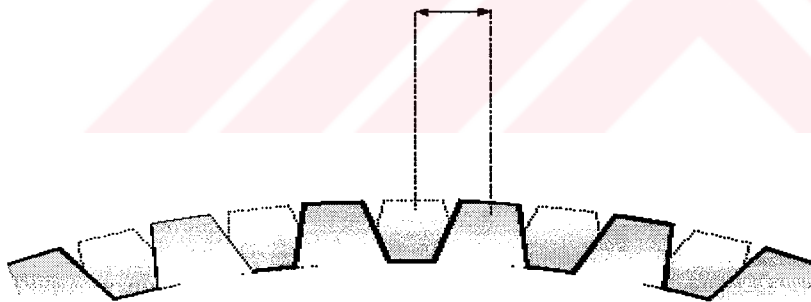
Exploded drawing illustrating the tooth pitch off-set
